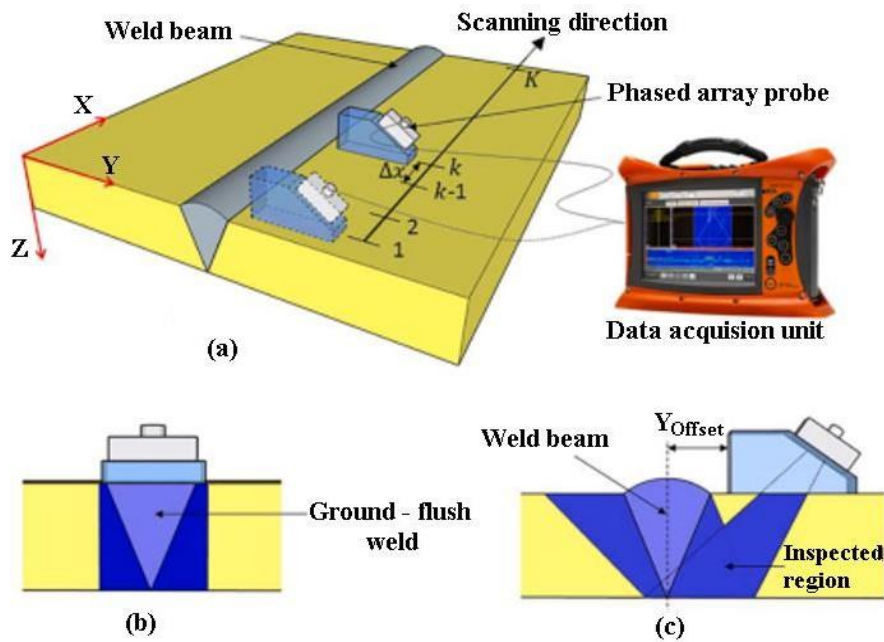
The lateral weld beam experimental setup (a), the B-scan for a ground-flush weld (b), and the S-scan for a regular weld (c) comprise the weld beam PAUT inspection process (Bouzenad et al., 2022)
